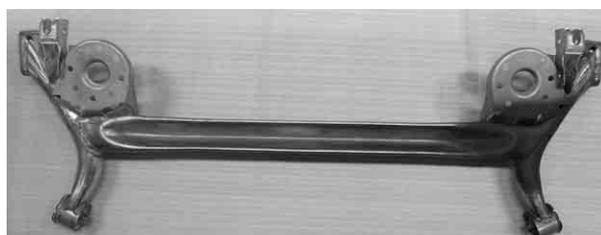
Rear axle to which the developed steel tube for torsion beam is applied
